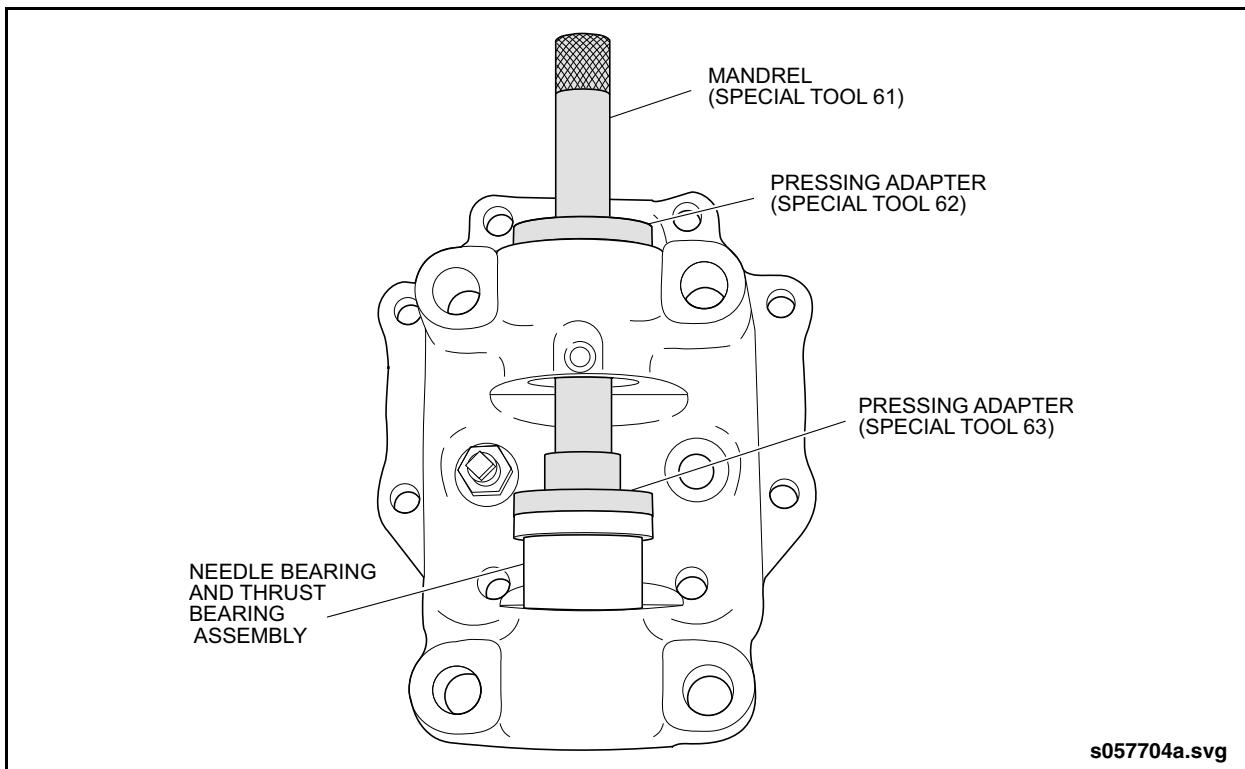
King Pin Needle & Thrust Bearing Installation
